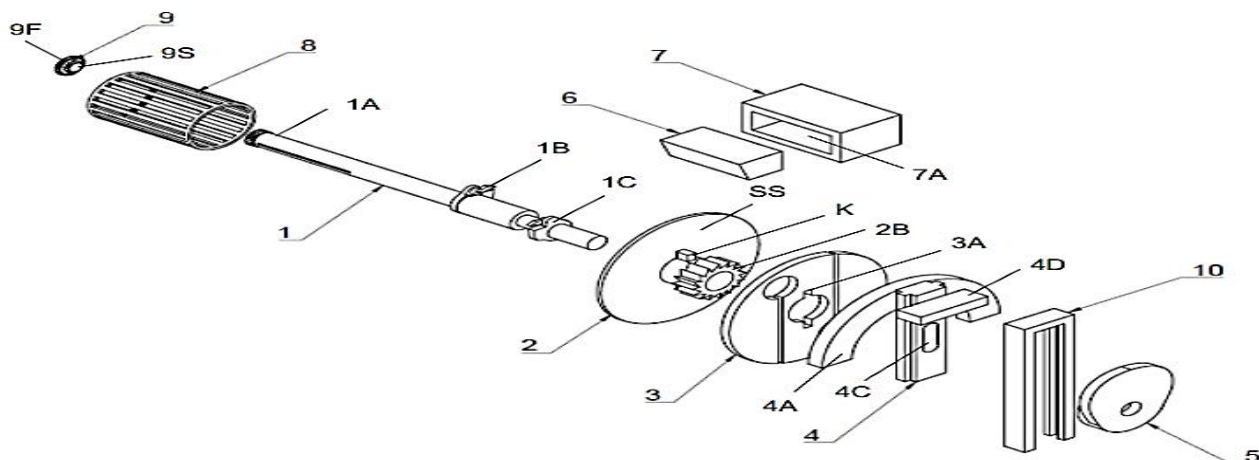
B(Above): Depicts exploded perspective front view of the mechanism for locking a seat belt in a vehicle
